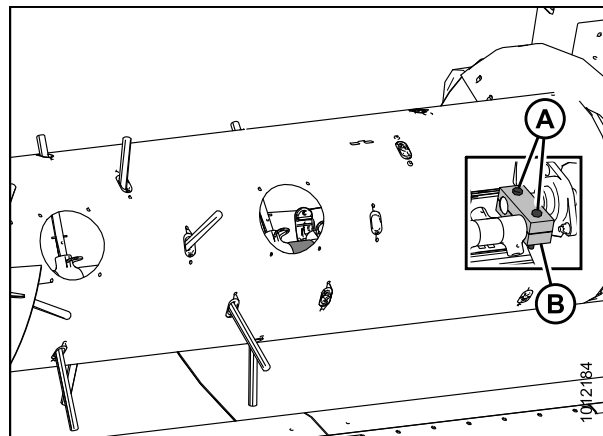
Left Side Finger Support Clamp (Cutaway View Shown)
